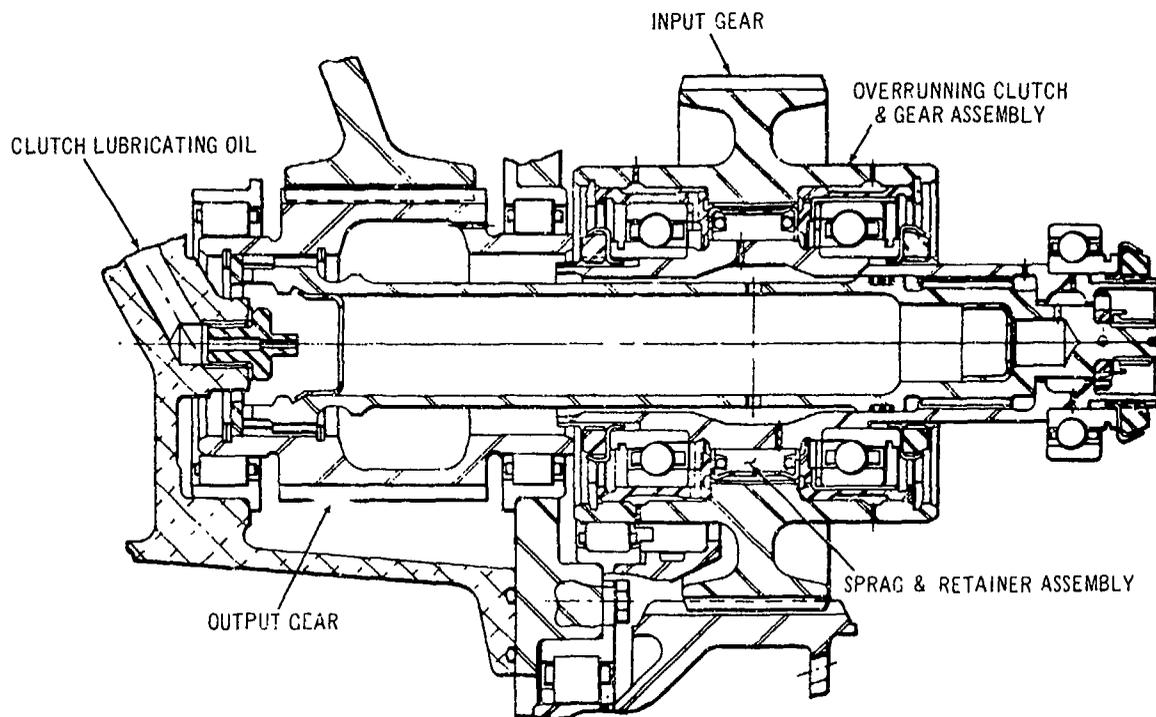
Partial View of Twinning Gearbox Showing Overrunning Clutch Installation
